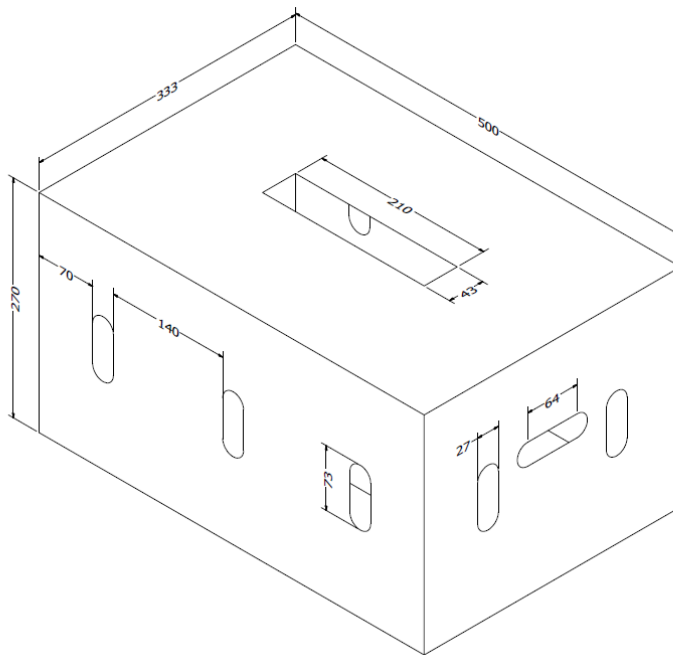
Geometry and dimension (mm) of the standard vent package
